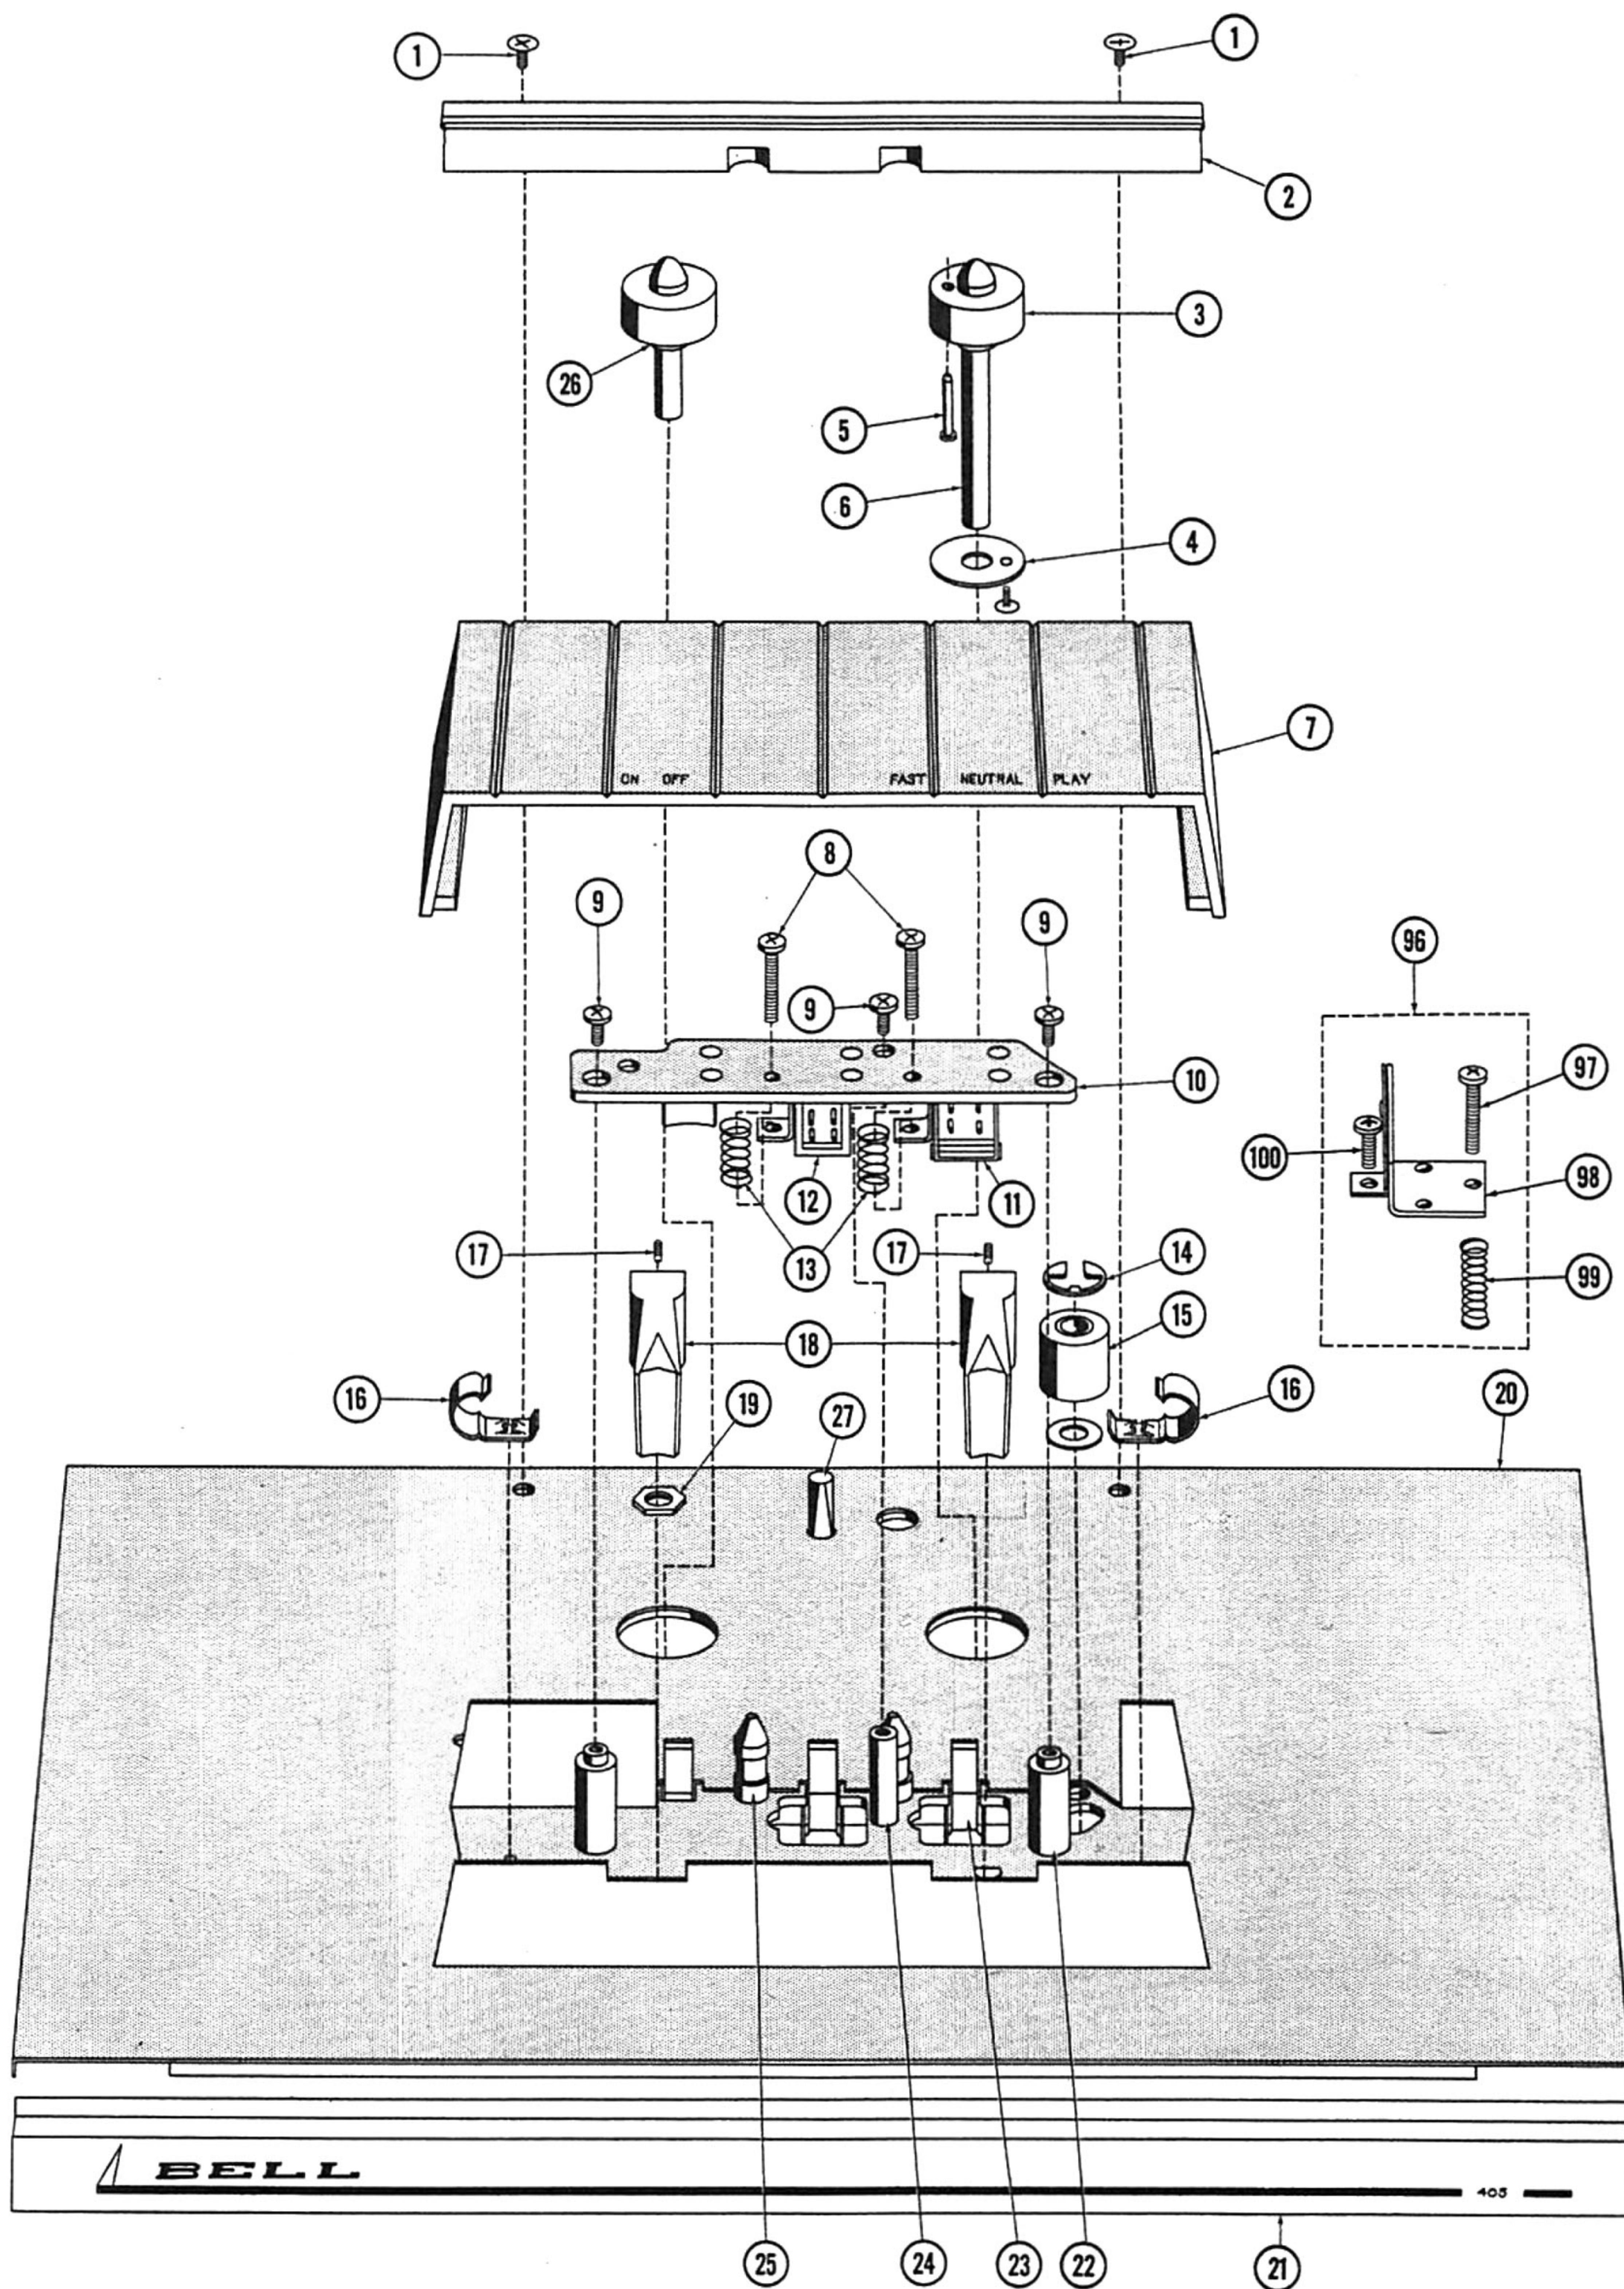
A EXPLODED VIEW OF PARTS ABOVE DECK COVER
